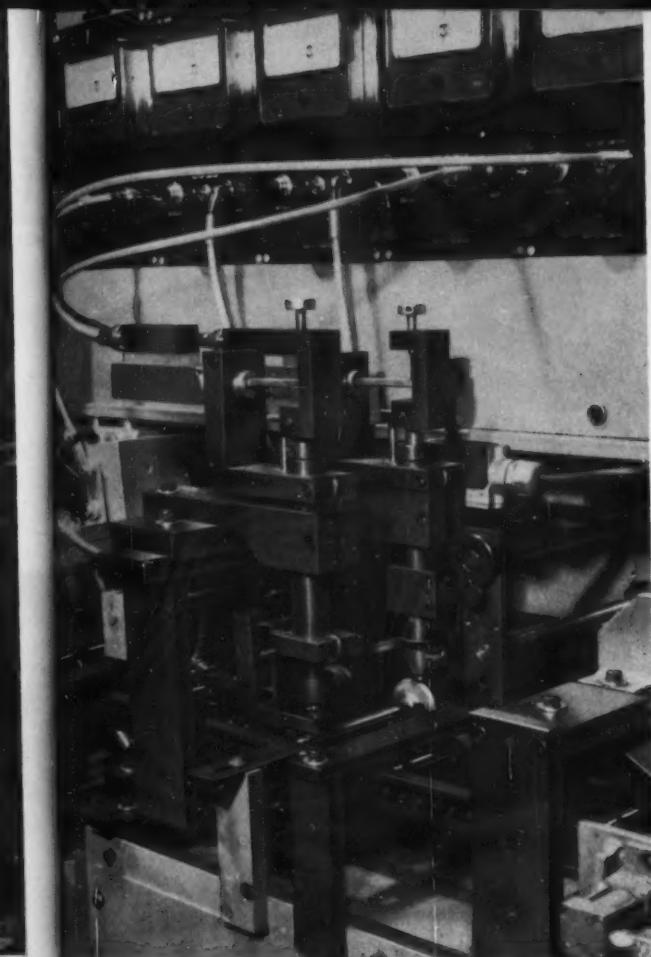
Electronic gaging machine automatically inspects valves at speeds up to 3000 parts per hour.
